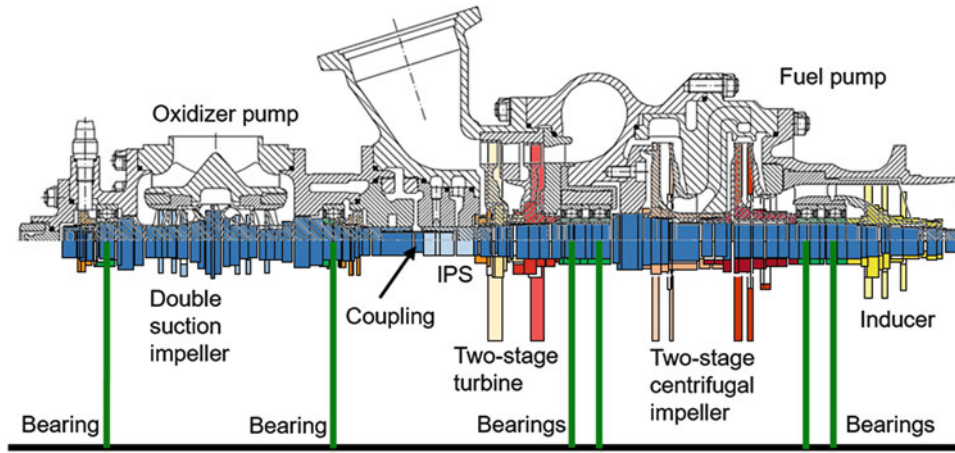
Rotor-bearing finite element model of single shaft turbopump
